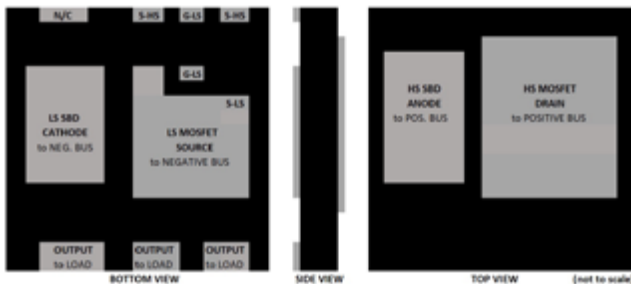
Type IV  $\mu$ MaxPak HB Package Outline Drawing
